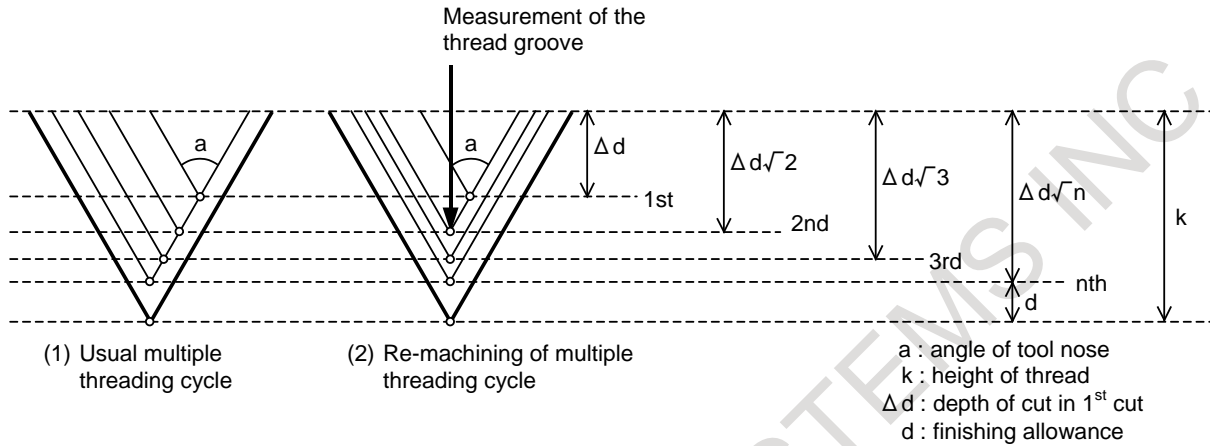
(c) cutting method of multiple threading cycle re-machining
